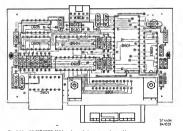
,20, IEC-625/IEEE-488 interface pcb, lay-out, conductor side
